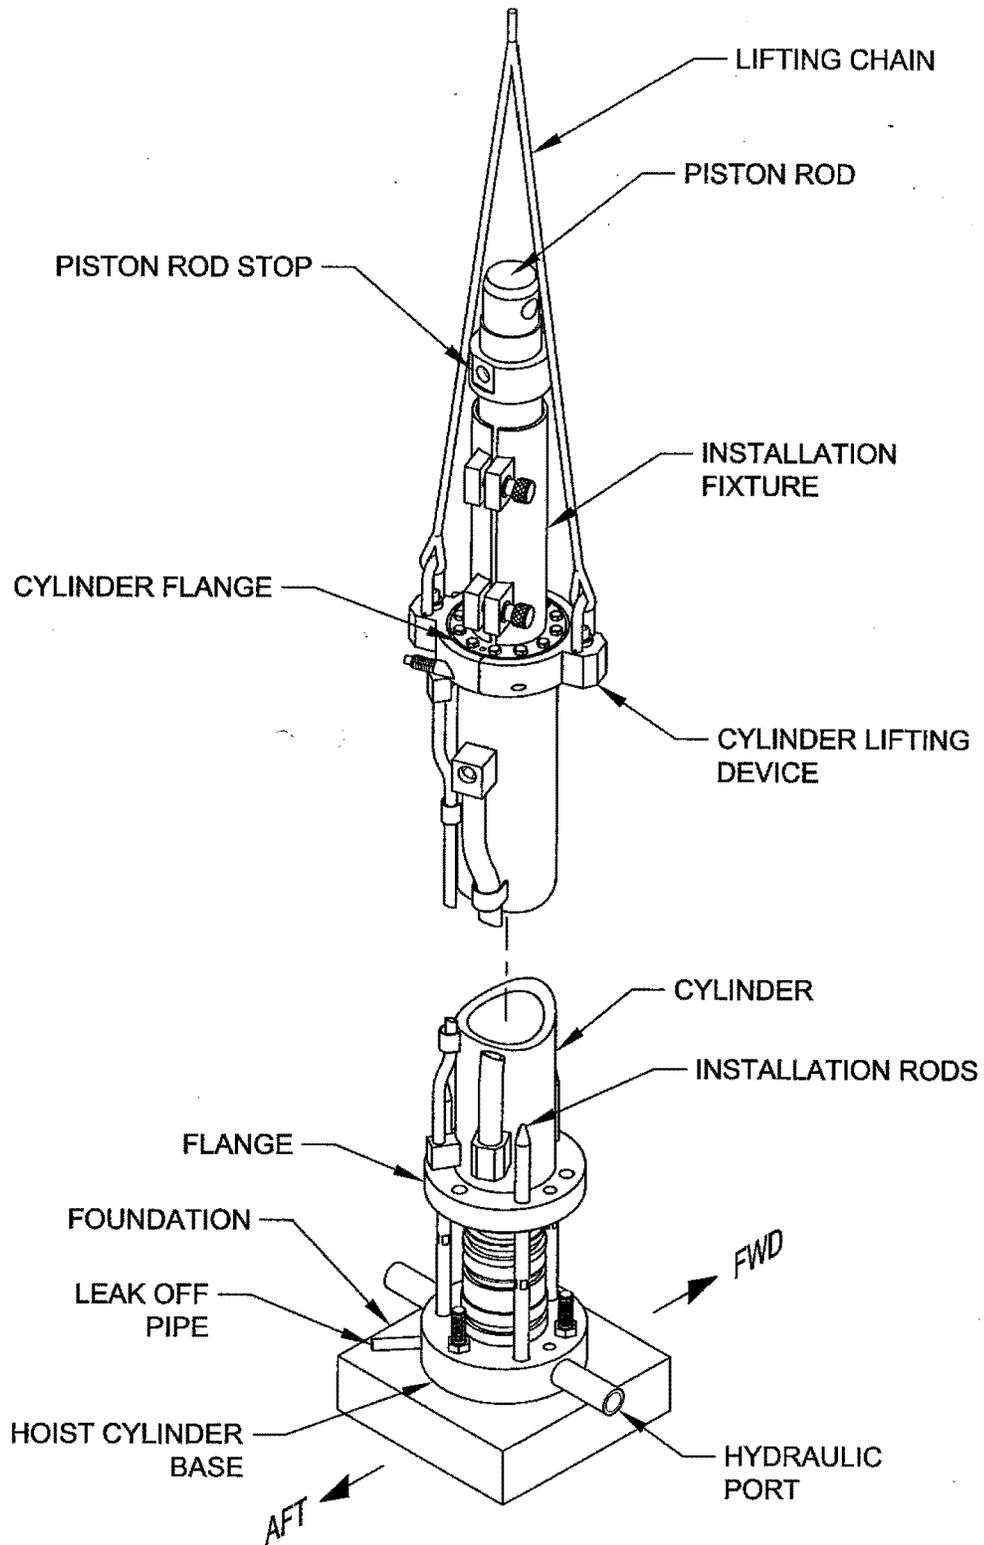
A Installation of Hoist Cylinder Lifting Device (Assy 382)
